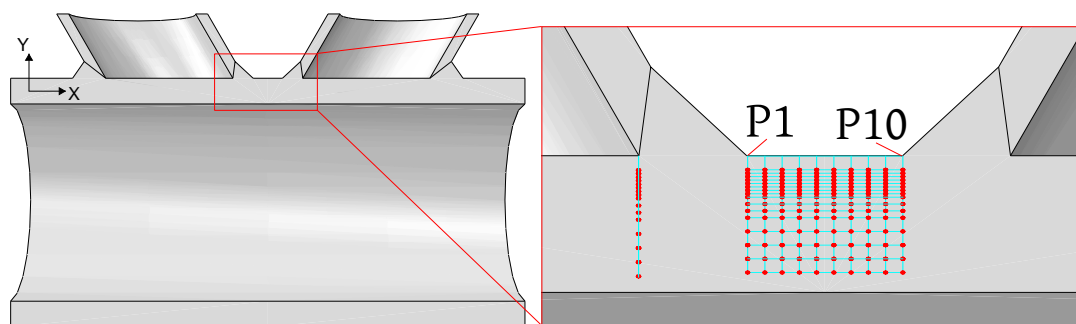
Locations of measurements for the specimen S10-690 (Weld backing ring not shown in the drawing).
